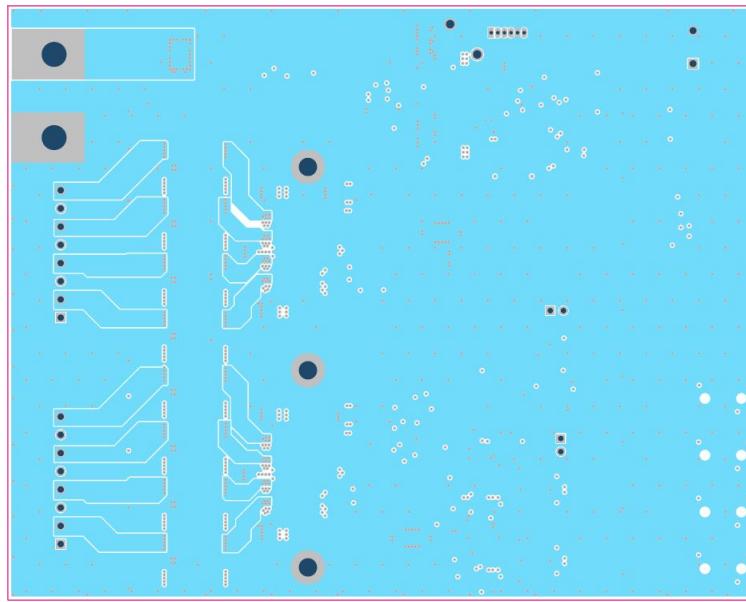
TIDA-00733 Circuit Board—Inner Layer 1
